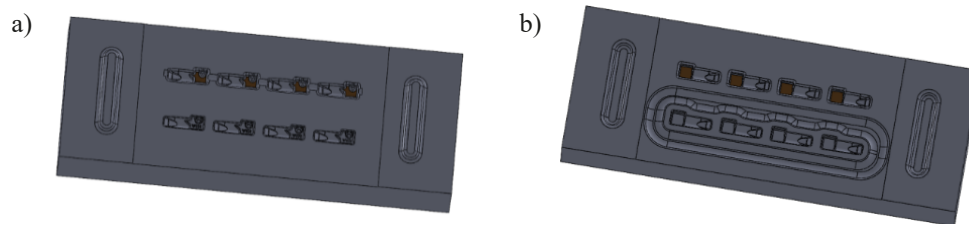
Construction of the forging tools in the arrangement: element behind element, with folding 10×80 mm: a) lower die, b) upper die
